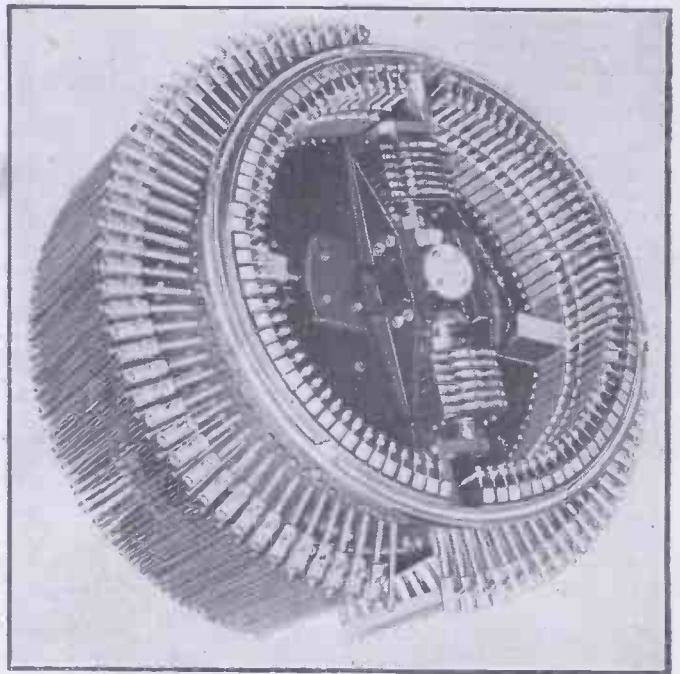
Accelerator unit showing construction of resistors and contact making arm.
